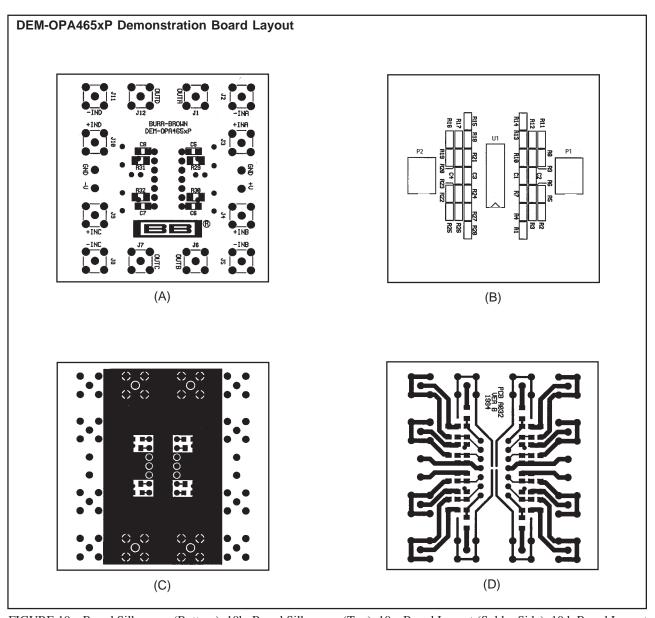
Board Silkscreen (Bottom). 10b. Board Silkscreen (Top). 10c. Board Layout (Solder Side). 10d. Board Layout (Component Side).
